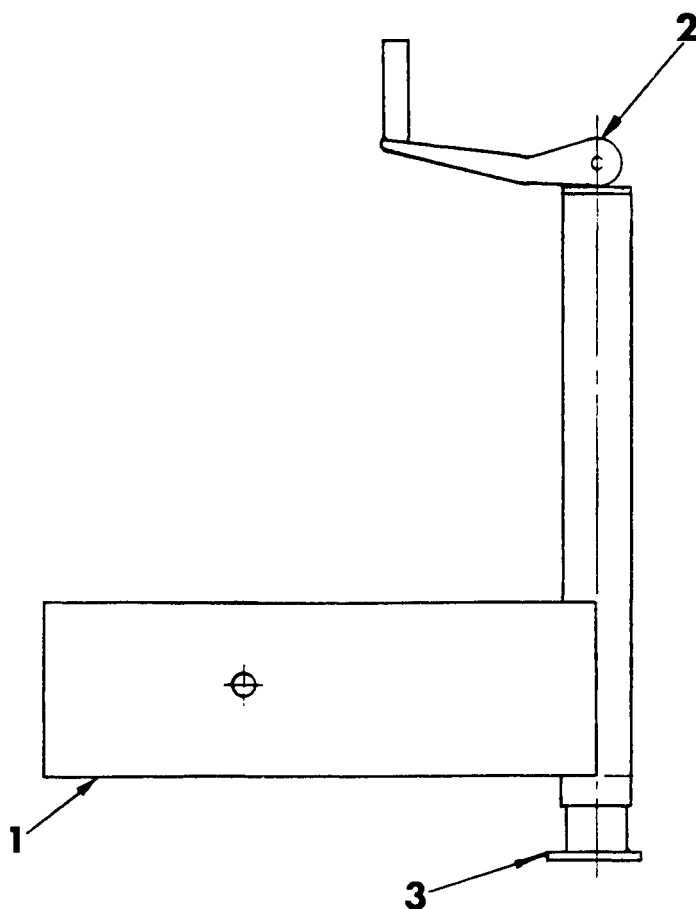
A - HYDRAULIC OUTRIGGER ASSEMBLY
